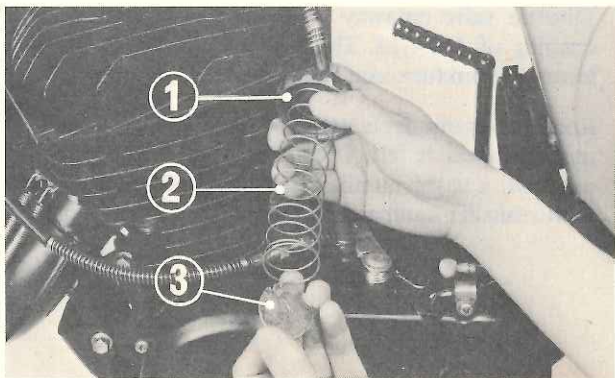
(1) Carburetor top (2) Throttle valve spring (3) Clip plate
